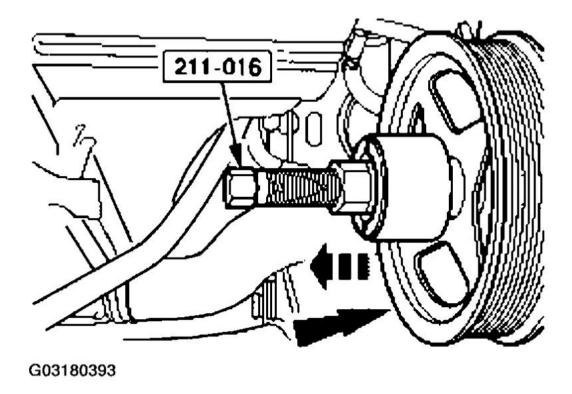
Removing Pulley Courtesy of FORD MOTOR CO.
